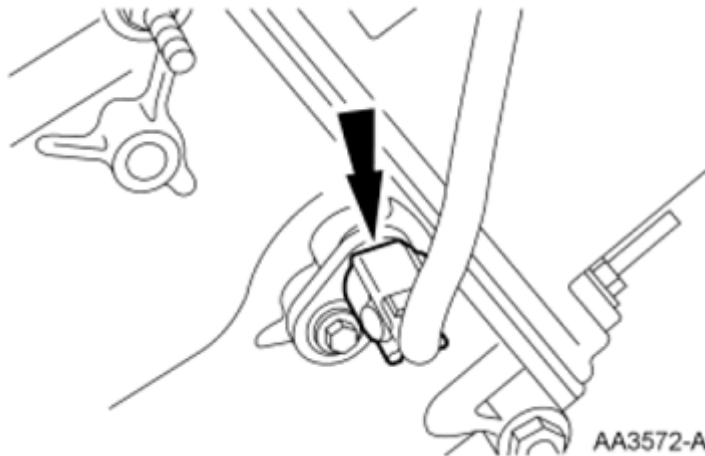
Locating Ignition Coil Electrical Connectors
